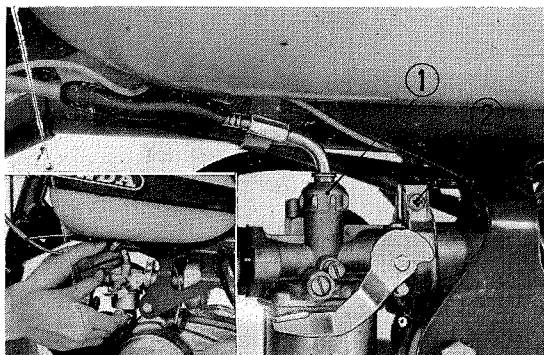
① Throttle cable lock nut ② Air cleaner case band screw
